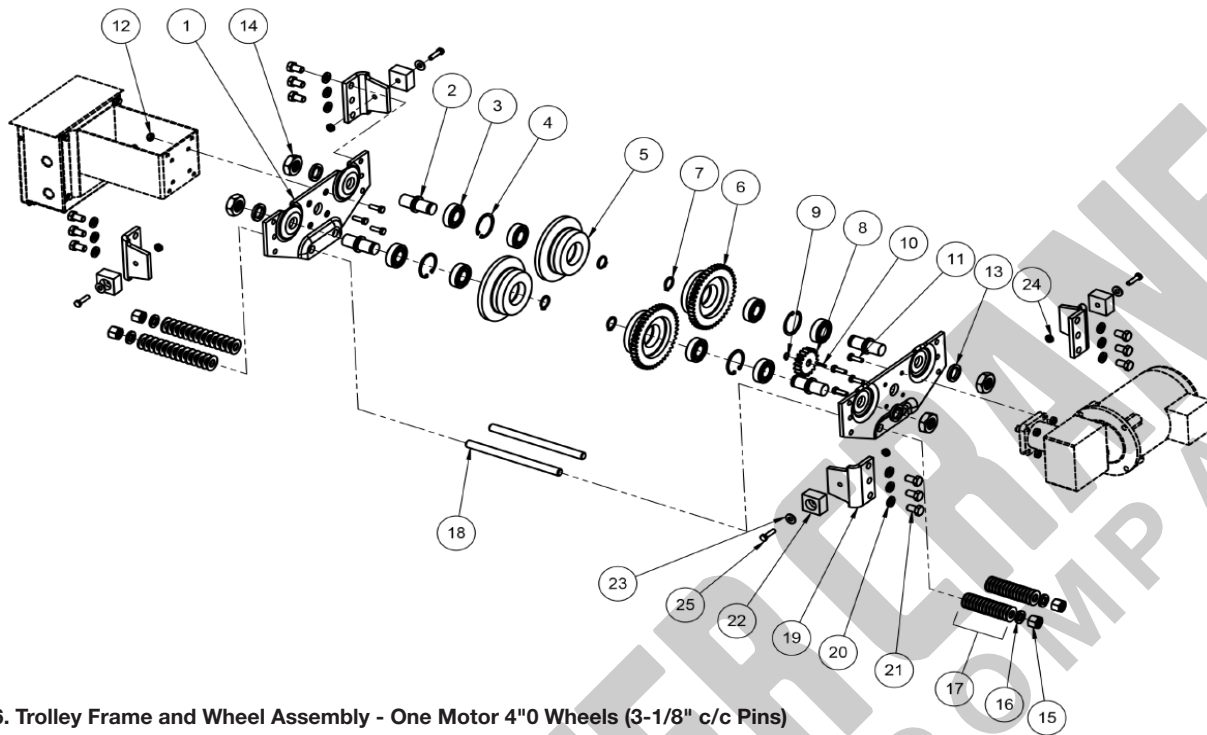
Trolley Frame and Wheel Assembly - One Motor 4"Ø Wheels (3-1/8" c/c Pins)
